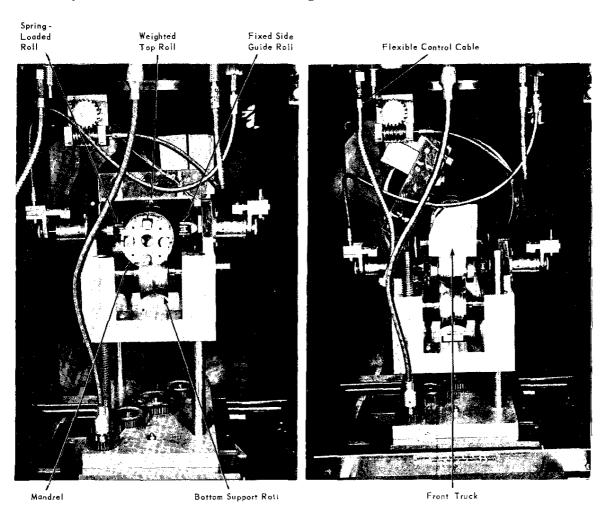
END VIEW OF RIGHT EXTENSION CABINET
